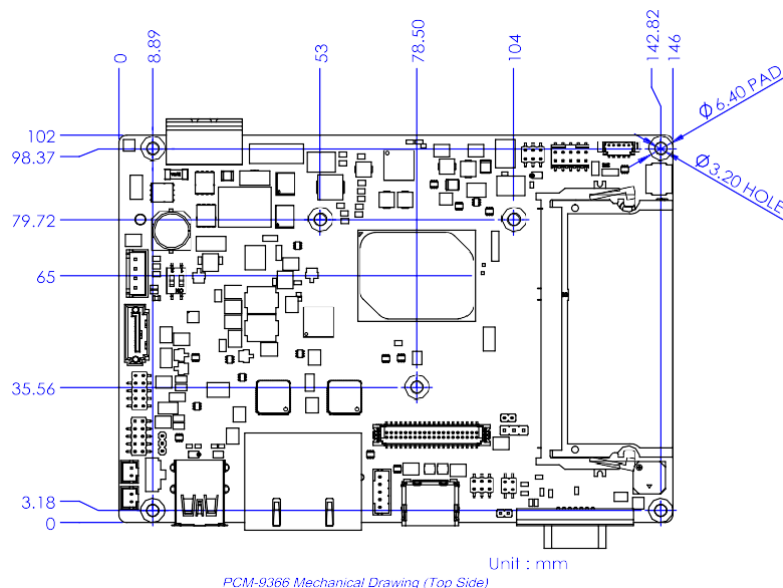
PCM-9366 Mechanical Drawing (Top Side)
